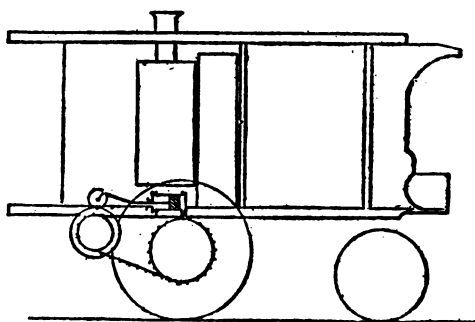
Le Blant's Steam Road Carriage (Side Elevation).
